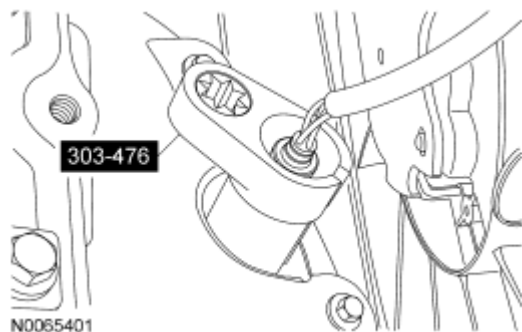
Removing Heated Oxygen Sensor (HO2S) Using Special Tool (303-476)
